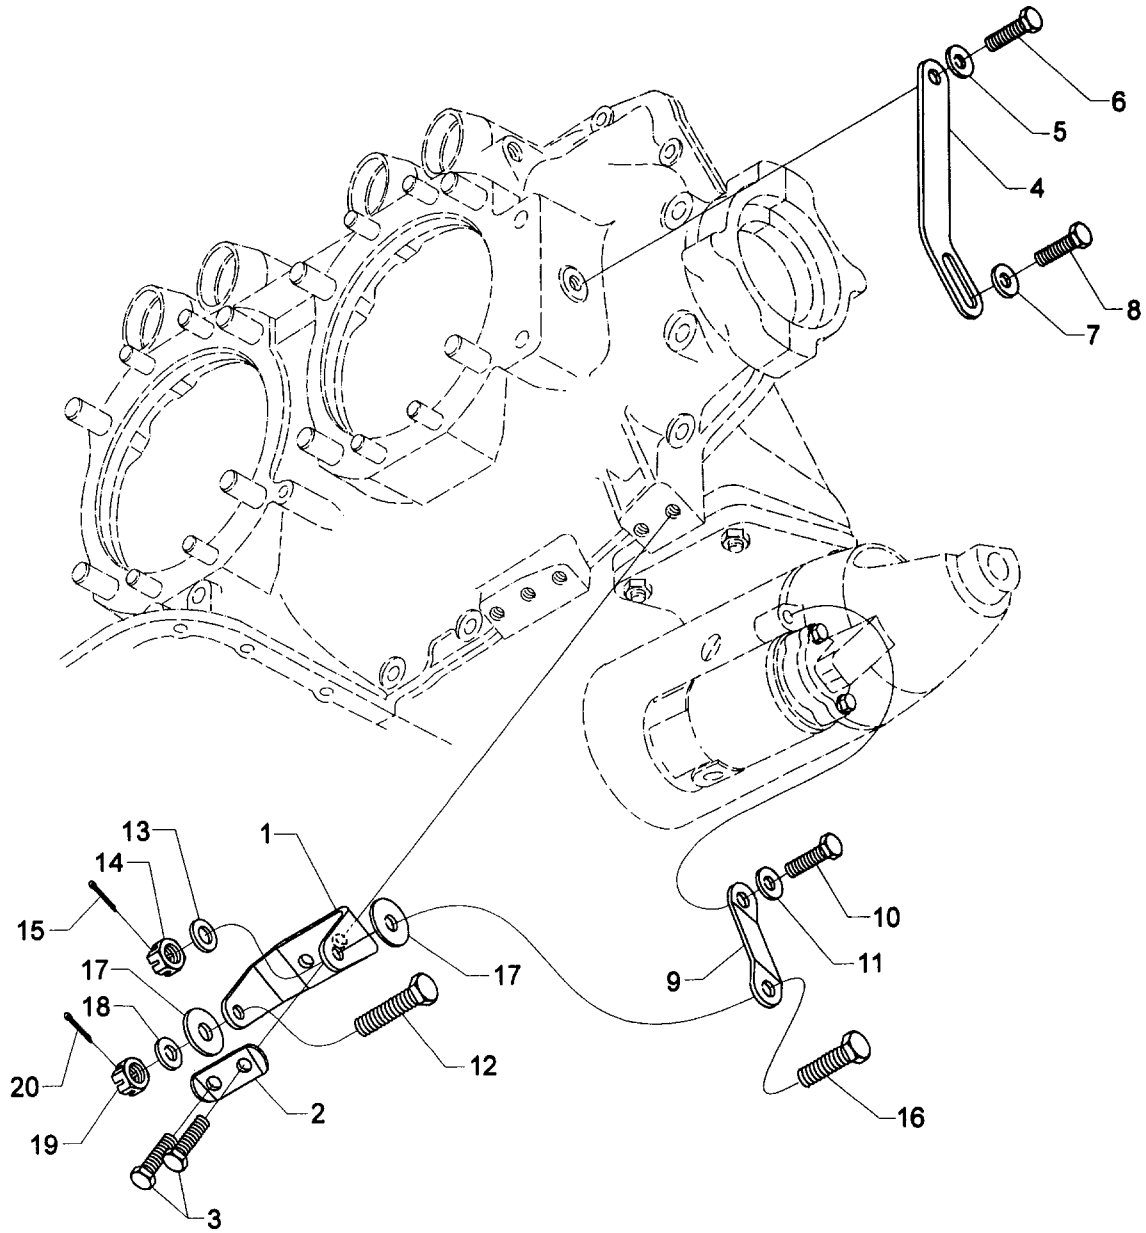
ALTERNATOR MOUNTING AND ATTACHING PARTS
